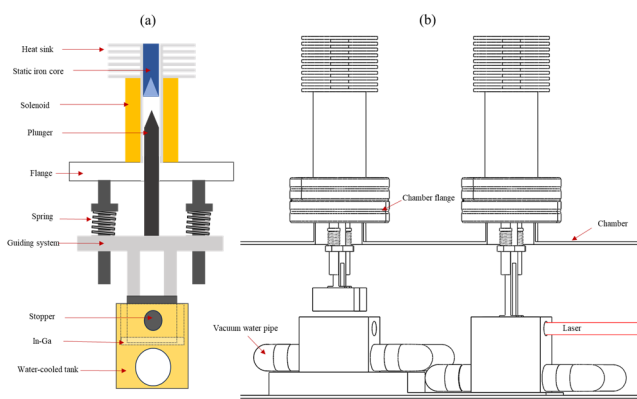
Shutter structure. (a) schematic diagram of key driving principles (b) actual drive plan structure assembly drawing.
